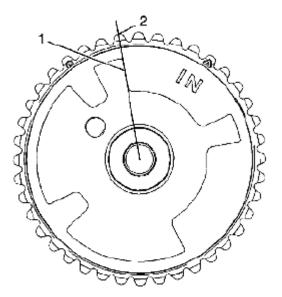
Locating Camshaft Position Actuator Courtesy of SUZUKI OF AMERICA CORP.
